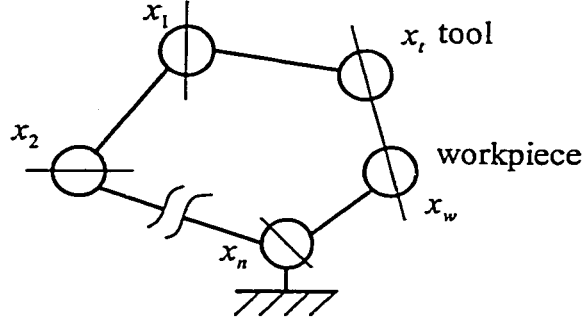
Transfer function between a tool and workpiece on the machine tools
